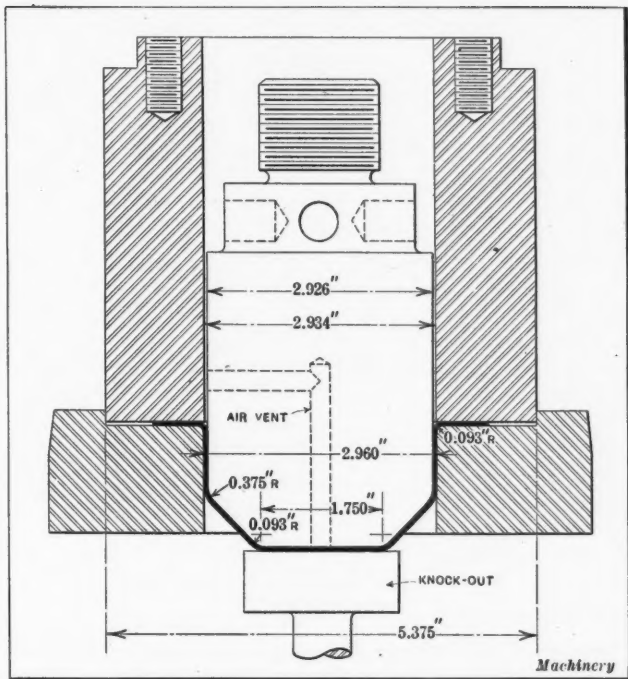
Punch and Die used in the Blanking and First Drawing Operation
